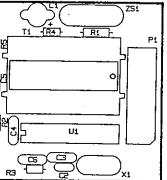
PC Assembly, I/O Board 1A2A8, page 3/3.
